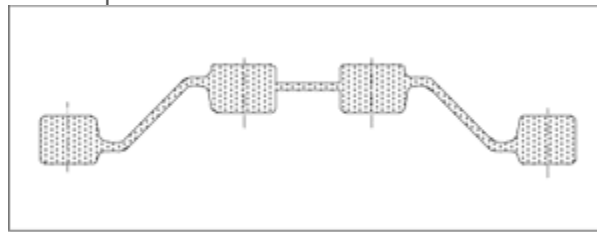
Where production quantities justify two sets of impression dies, the forgings can be oriented opposite to balance the side loads. This arrangement permits the holes in the bosses to be forged to reduce the amount of machining required.
